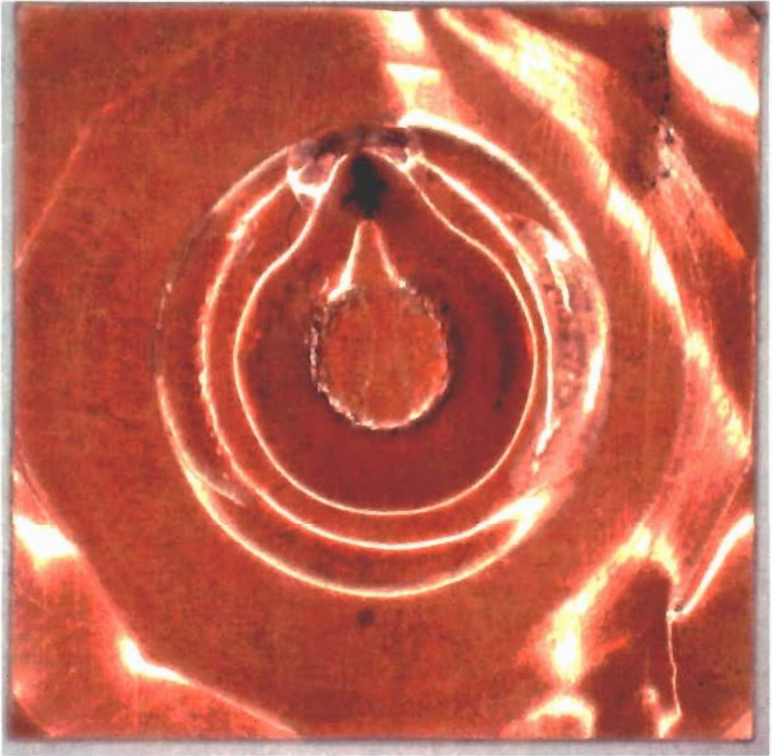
Crack through Kapton substrate with "Tear Drop" failure pattern.
